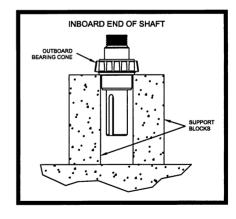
Removal of Outboard Bearing Cone (Option #1)
